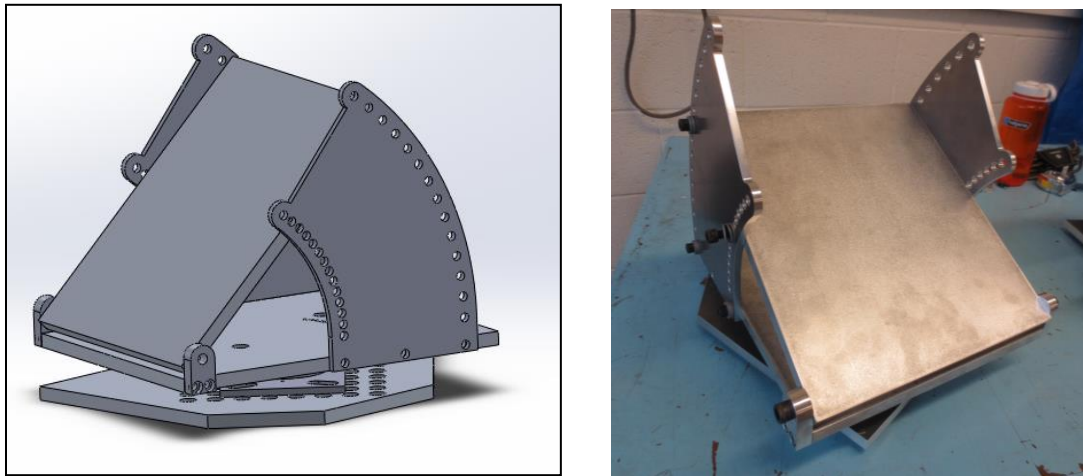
CAD model (*left*) and fabricated (*right*) lower mirror mount.
